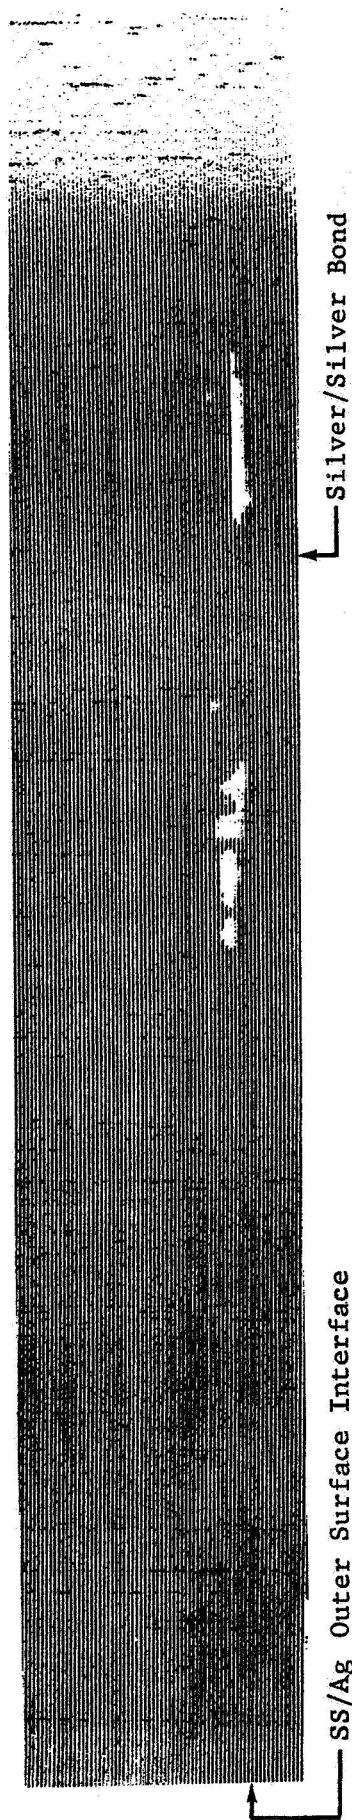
Ultrasonic Inspection Readout of Explosive Welded Reference Joint
